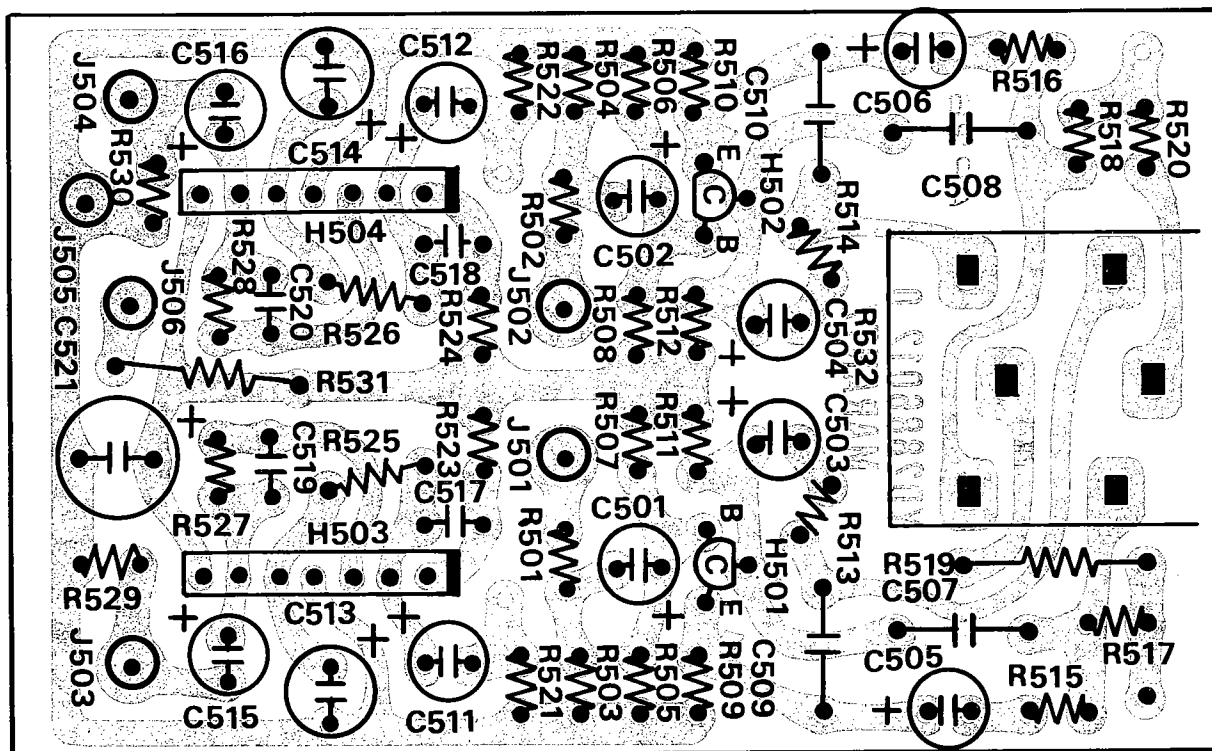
Vari-Matrix Unit Assembly P500 Component Locations
